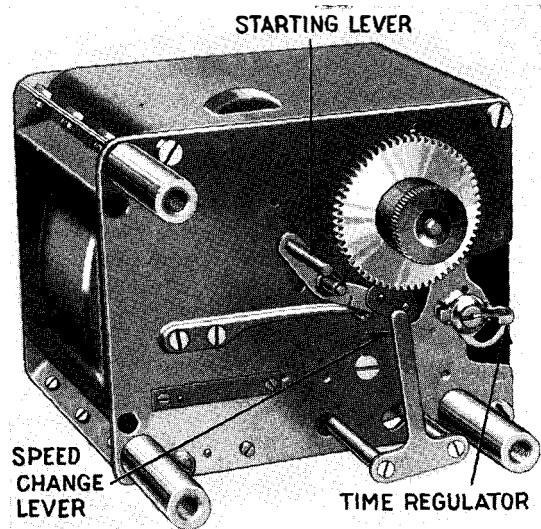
Spring Driven Hand Wound Eight-Day Clock
